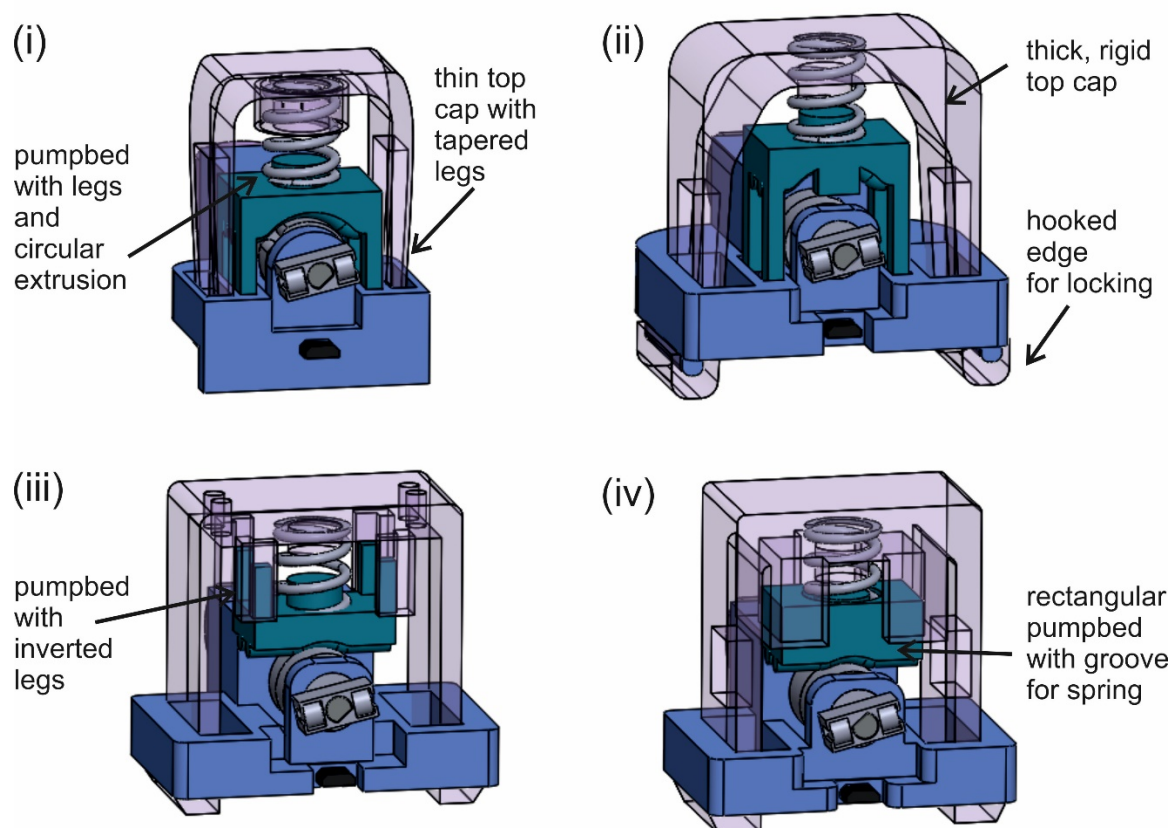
3D CAD assemblies of the single spring pump showing the evolution to the current working version.
